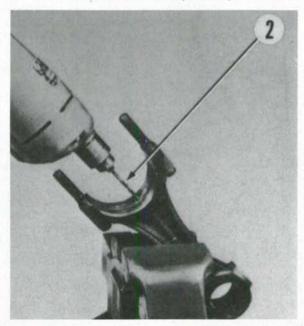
On TW-15, TW-25 and TW-35 models, a 5/32 inch (4 mm) diameter hole must be drilled in bottom of bushing, drilling from crankshaft end of rod as shown.
